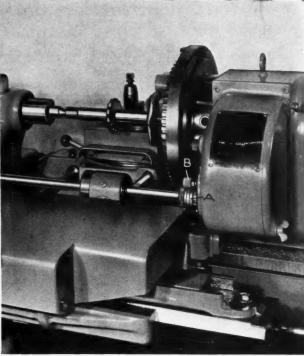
Rear View of Change-gear Housing, Showing Timer A, which Permits Operator to Pick up Any Relief at Any Desired Point with Universal Relieving Attachment
